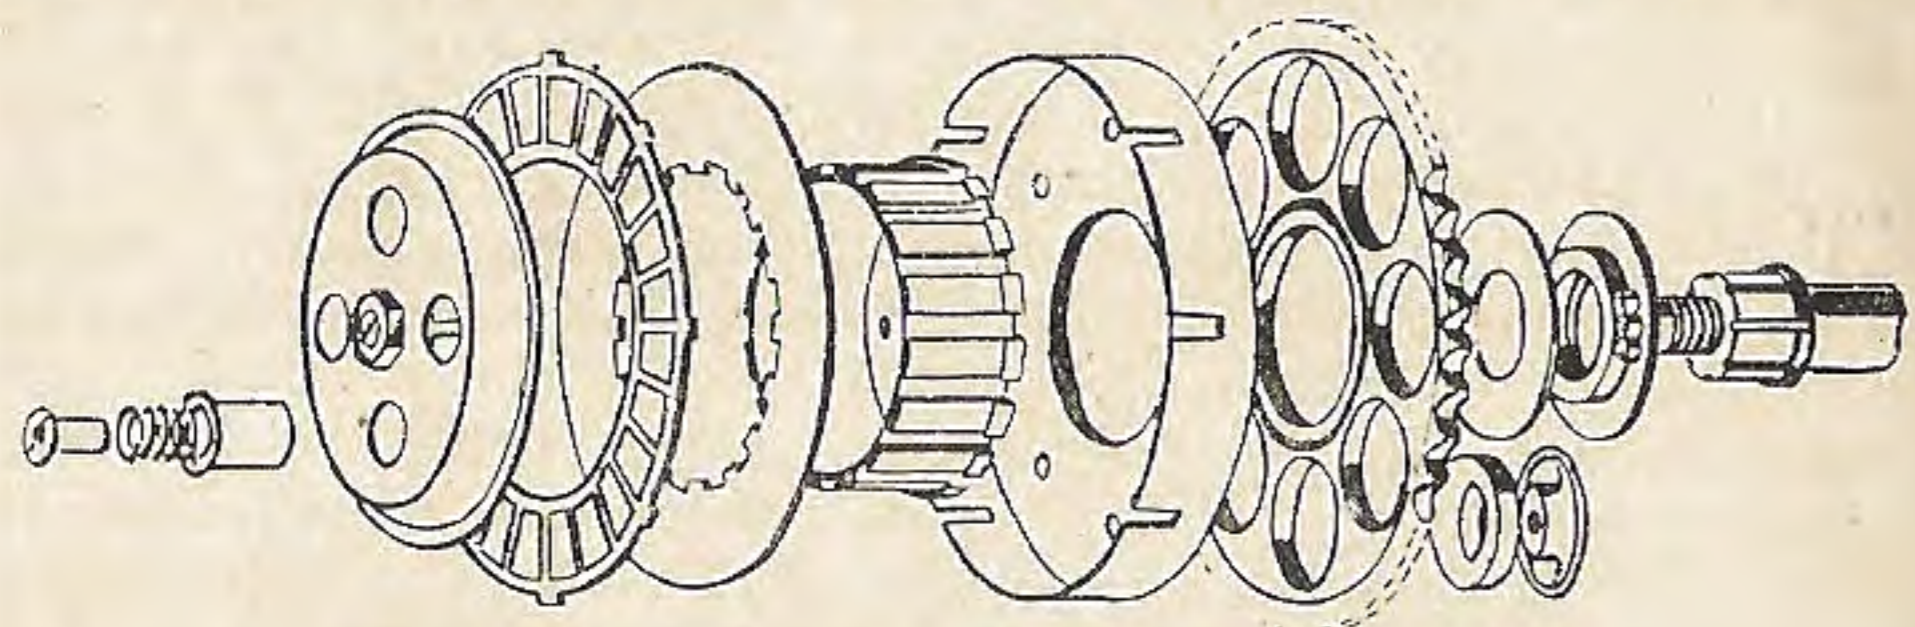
SHOWING BURMAN CLUTCH ASSEMBLY
